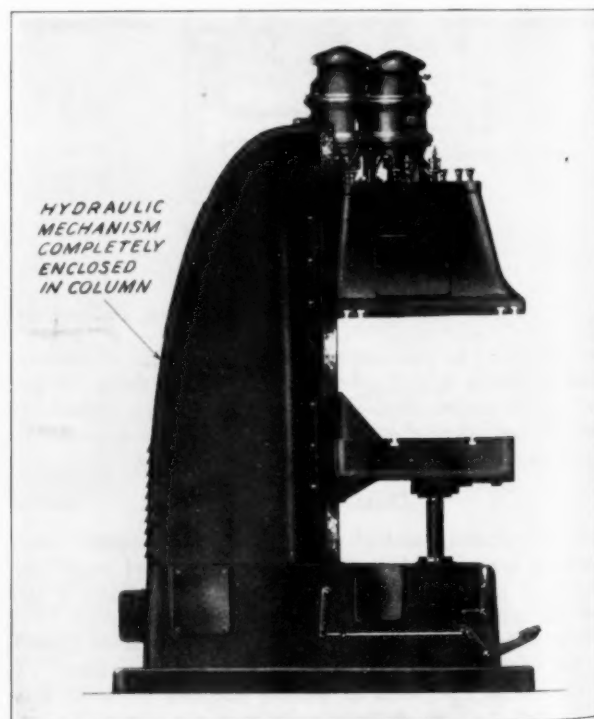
MULTIPLE-SPINDLE DRILL, SIDE VIEW
